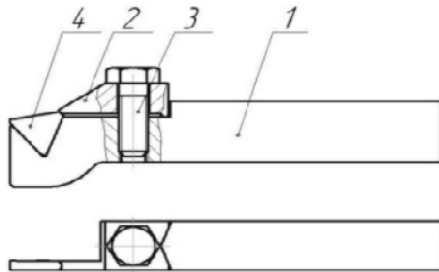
Design of assembled cutoff tool with lateral mounting of MUP
